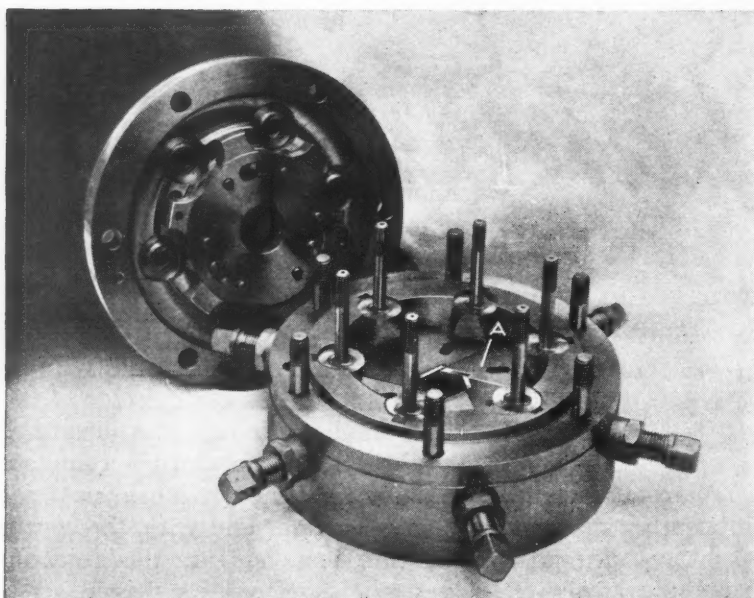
Several different sizes of hexagonal stock can be cold-drawn in this adjustable carbide-insert die. The view shows the relative positions of the parts, including six carbide-insert pieces (A)
